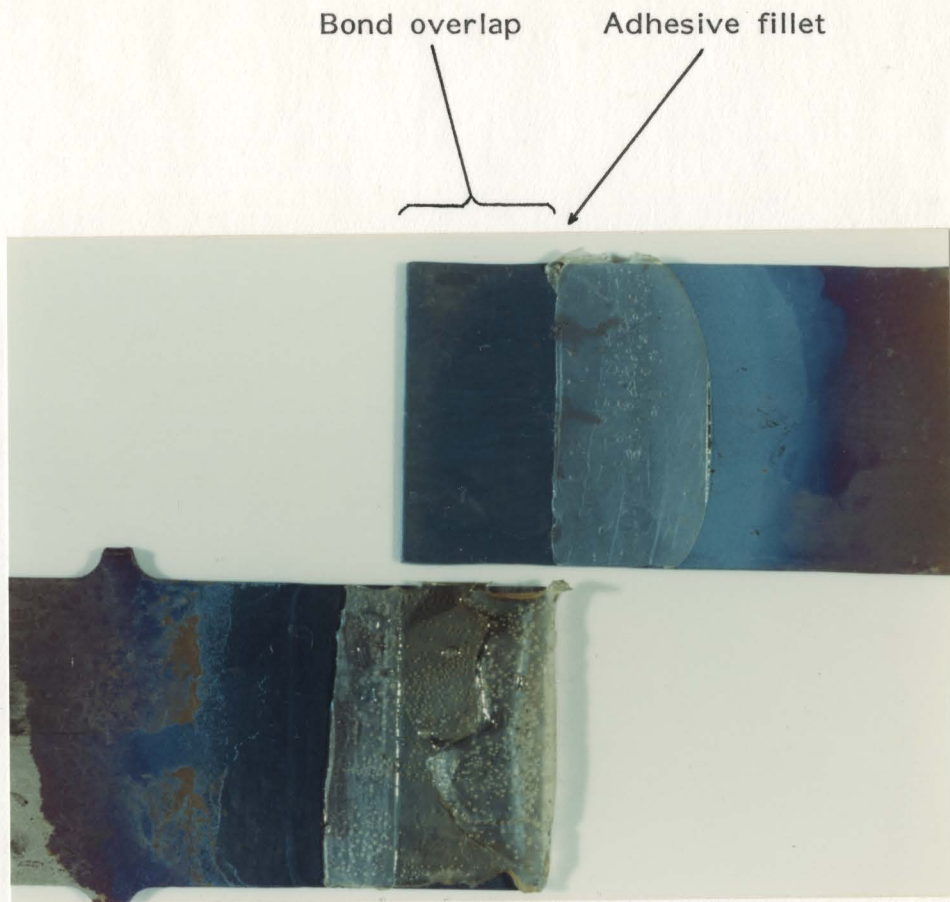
Photograph of a Fracture Surface for a Single Lap Bond Illustrating Apparent Failure I.
